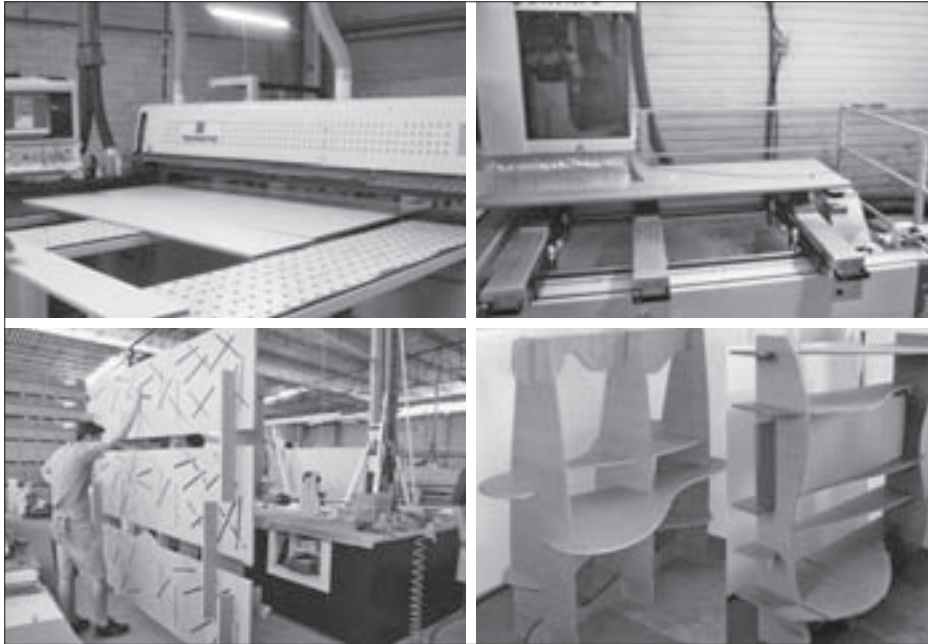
DRAWING OF PIECES IN THE WORKSHOP
